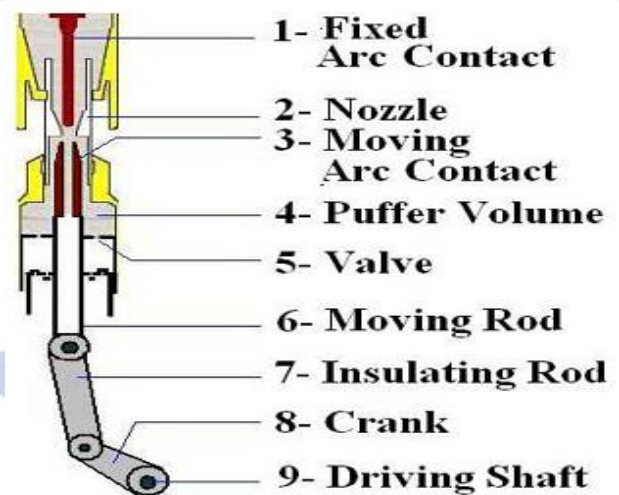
CB actuating device, where: 1: fixed arc contact, 2: -nozzle, 3: moving arc contact, 4: puffer volume, 5: valve, 6: moving rod, 7: insulating rod, 8: crank, 9: driving shaft.
